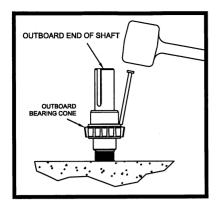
Removal of Outboard Bearing Cone (Option #2)
